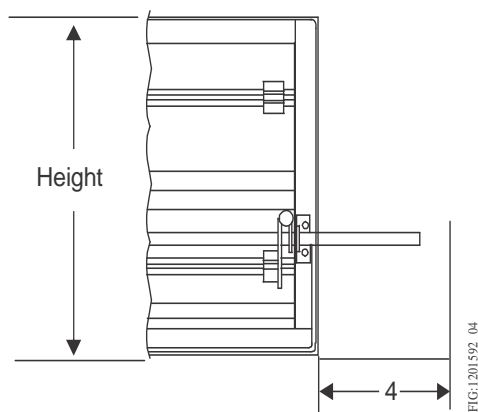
Mounting Dimensions with Electric Actuator - MS4120, MS8120
